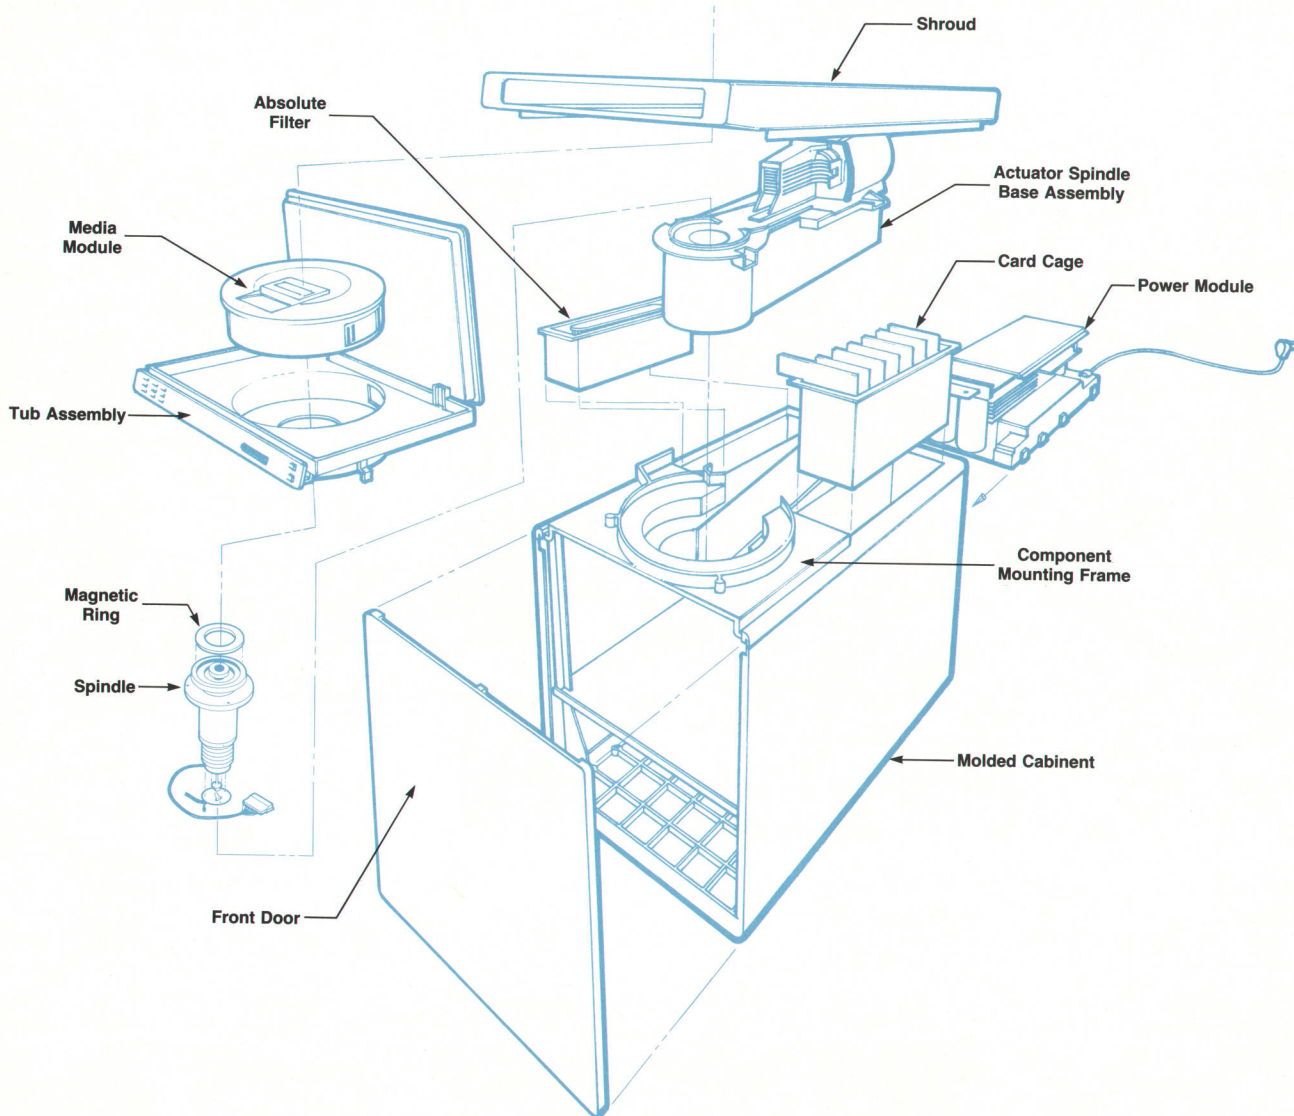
Exploded view of the 7933/35 Disc Drives.
